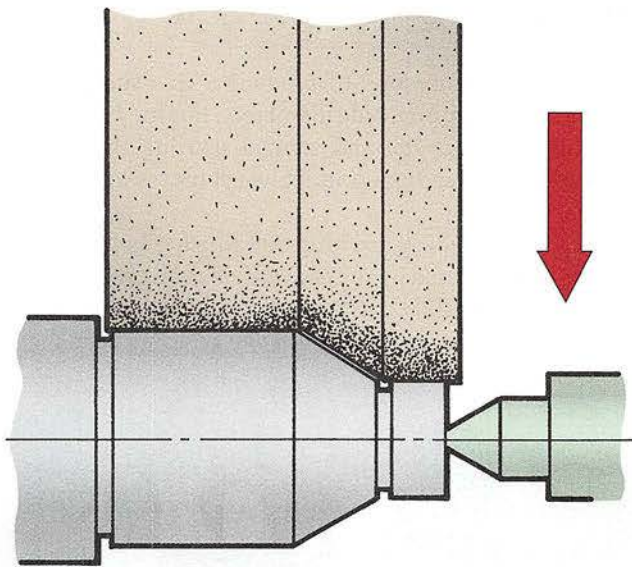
Close-up of a cylindrical grinding operation.
